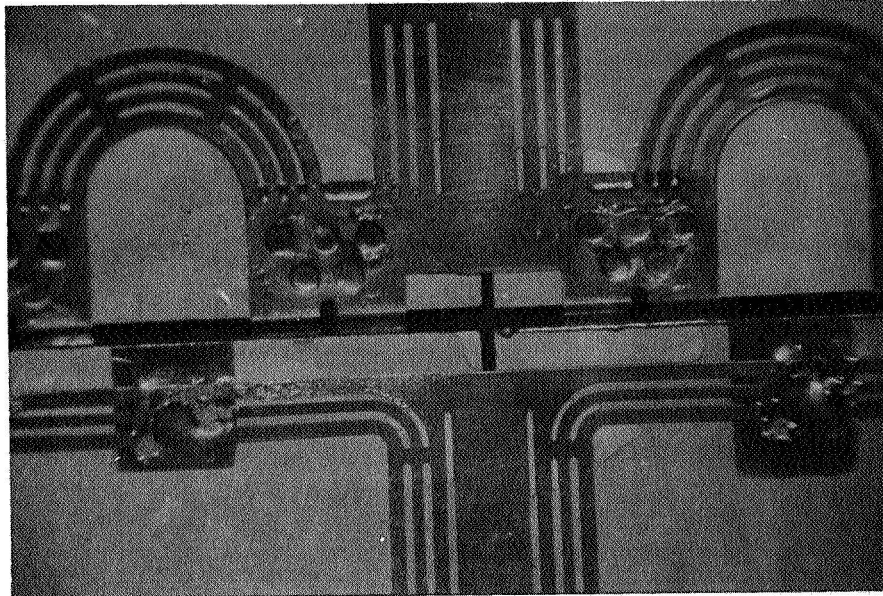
Closeup of Photoetched Solder Plates Interconnection
